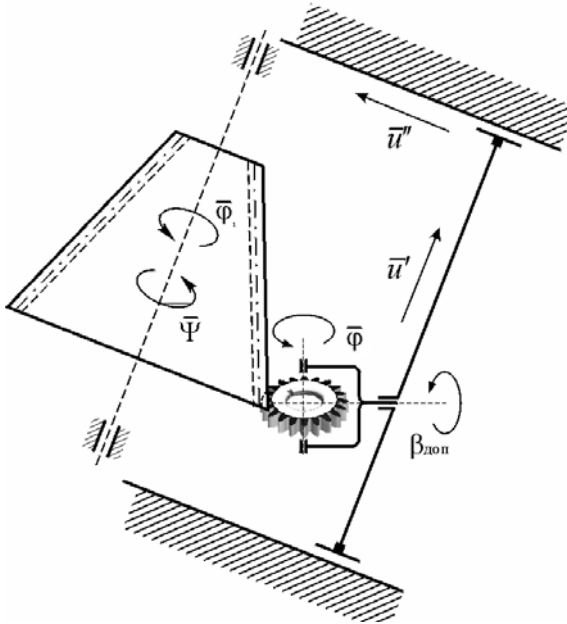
Kinematic scheme of model with initial position of revolving tool (shaper cutter) relative to feedwork [34, p. 69]
